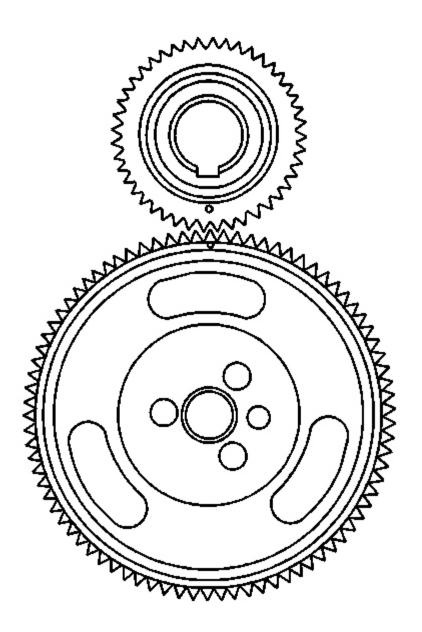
Balance Shaft Driven Gear Timing Mark Courtesy of GENERAL MOTORS CORP.
